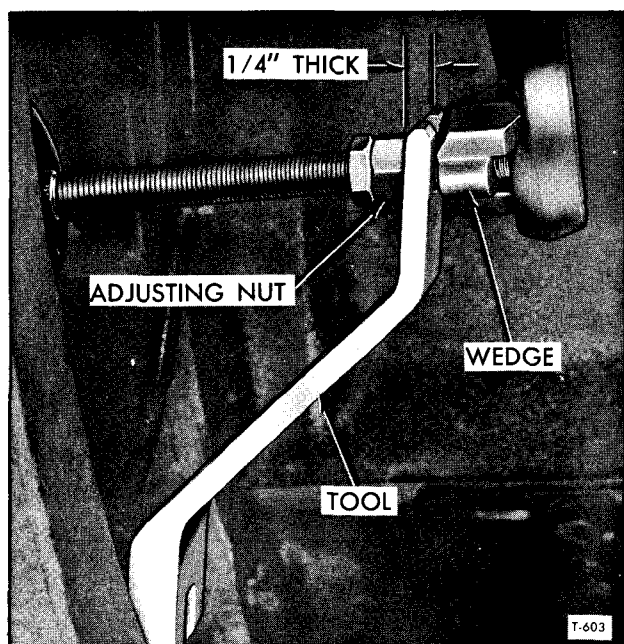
Checking Push Rod Clearance Using Small End of Tool
